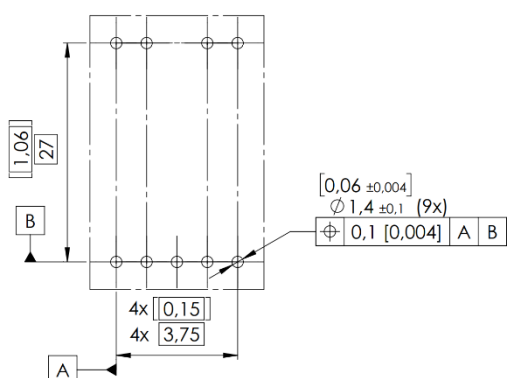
Transformer layout pattern (dimensions in mm [inch]).
